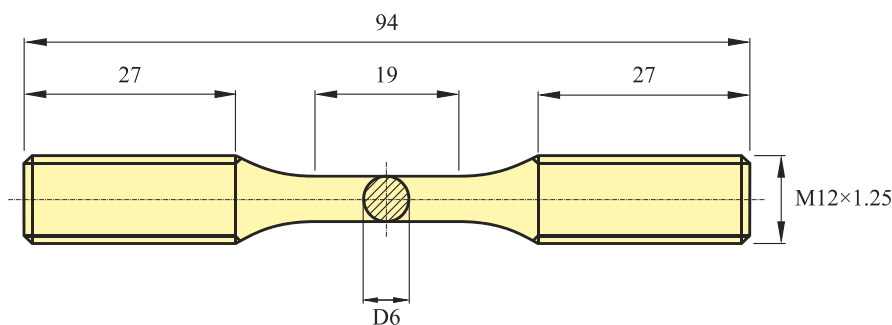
Specimen geometry of the low-cycle fatigue tests (dimensions in mm).
